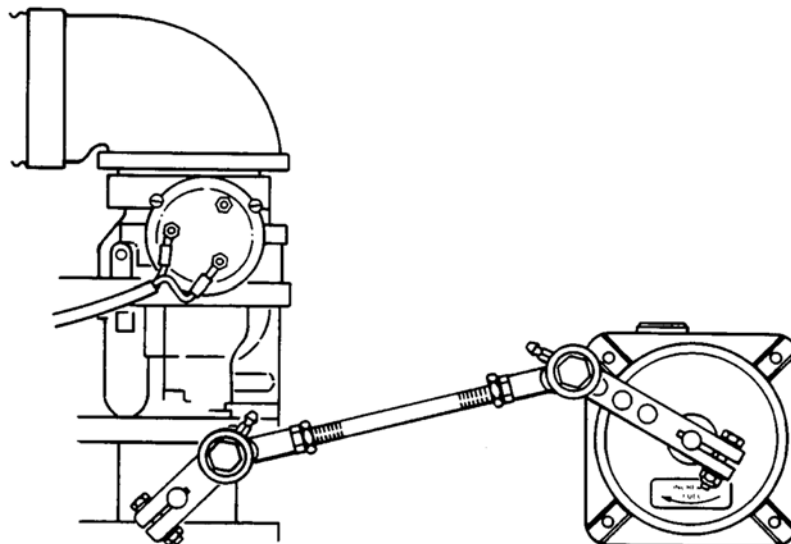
Carburetor Compensating Linkage at Maximum Fuel
